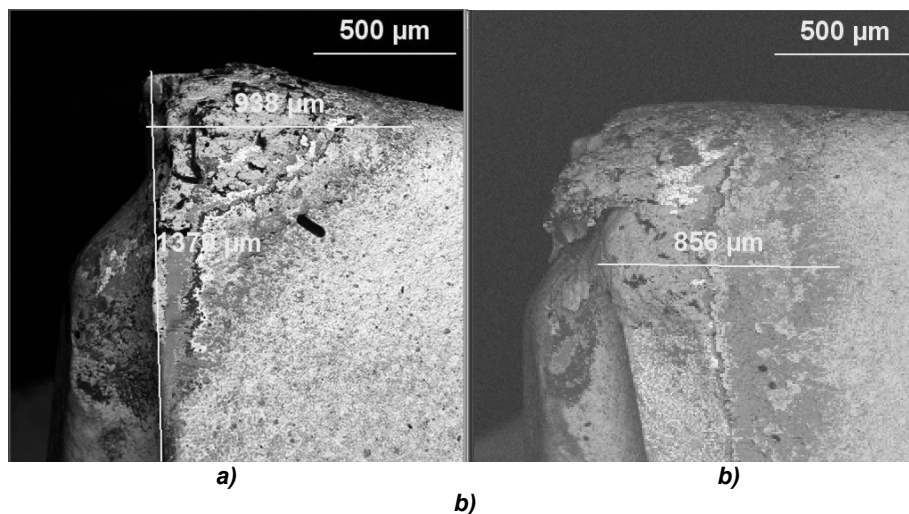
For the tools used to machine the skin region of the sand cast ductile iron, there was: (a) abnormal tool wear with a broken edge [1370 μm vertical, 938 μm horizontal] and (b) a buildup of ferrite on the tool tip [856 μm]. Both tools were SEM imaged after 30 minutes of machining.
